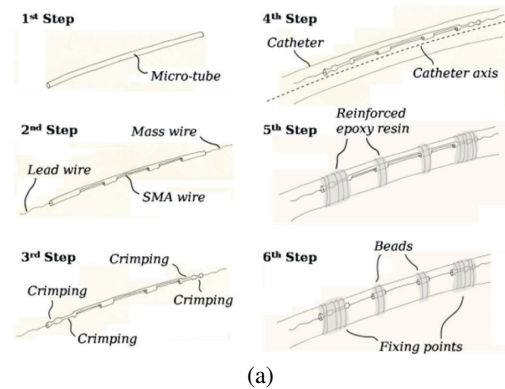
Details of the assembly and partial view of a 6-Fr active catheter (before overcoating).
